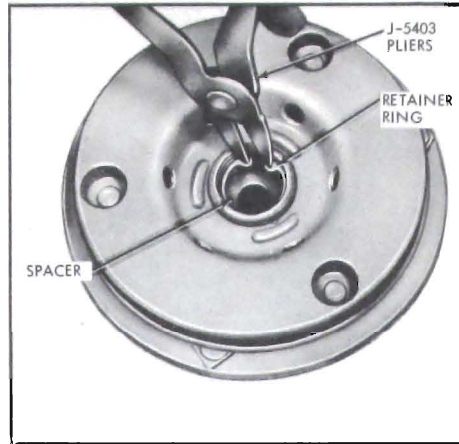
Removing Clutch Drive Plate Retainer Ring
